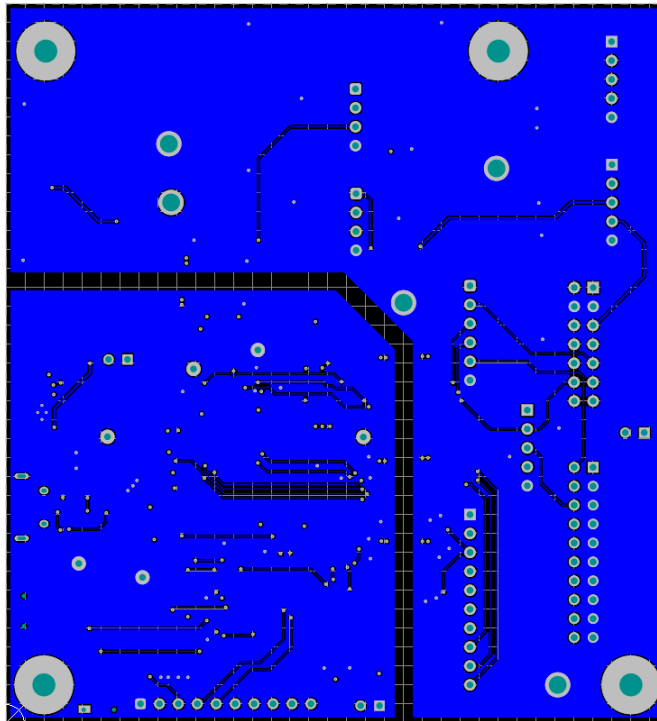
TPS92520EVM-133 Bottom Layer and Bottom Overlay (Bottom View)
